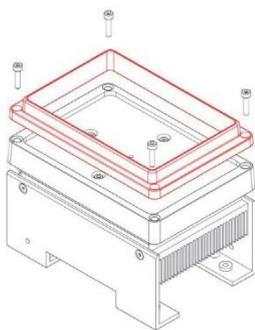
Unscrew the 4 screws at the corner and remove mounting frame.
